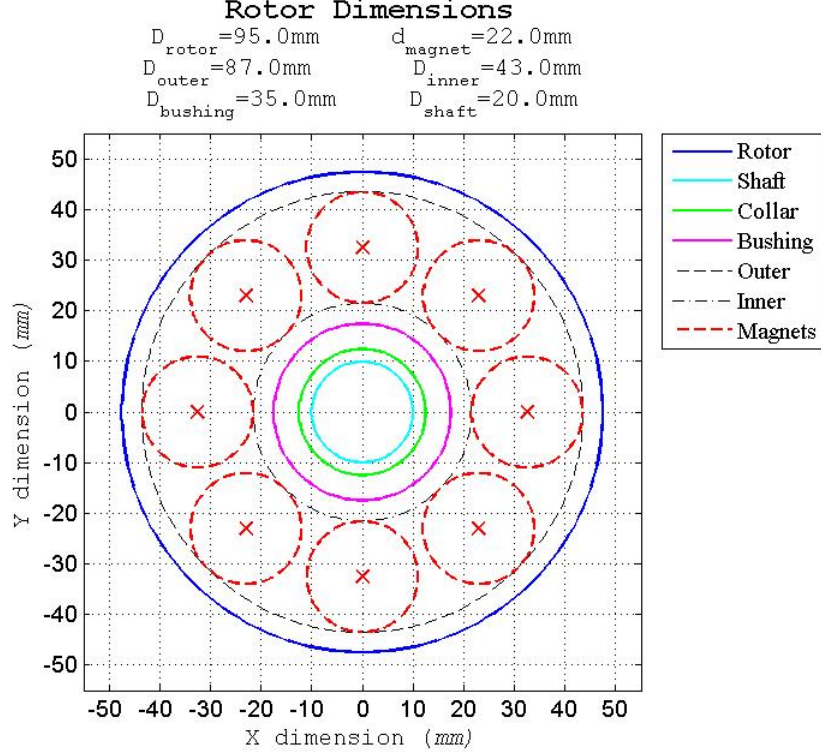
Axial view of the rotor. Rotor's principle dimensions are shown. The position of the 8 magnets are drawn in red with crosses indicating their centre points. An appropriately scaled version of this figure was used as a template for magnets' holes positioning.
